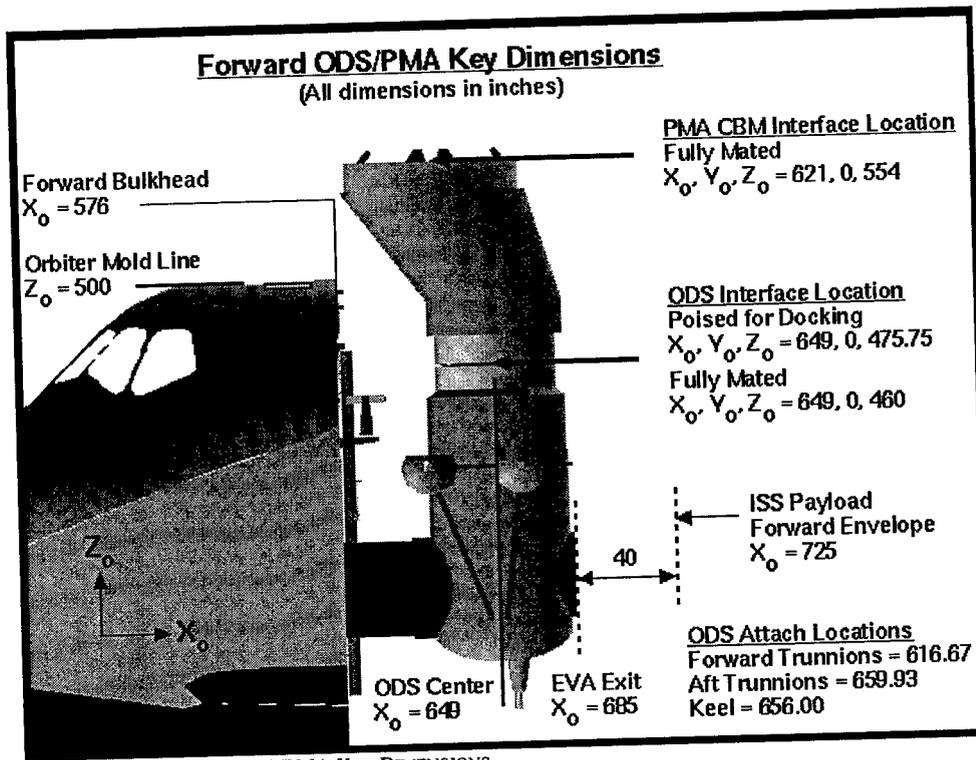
FORWARD ODS/PMA KEY DIMENSIONS.
